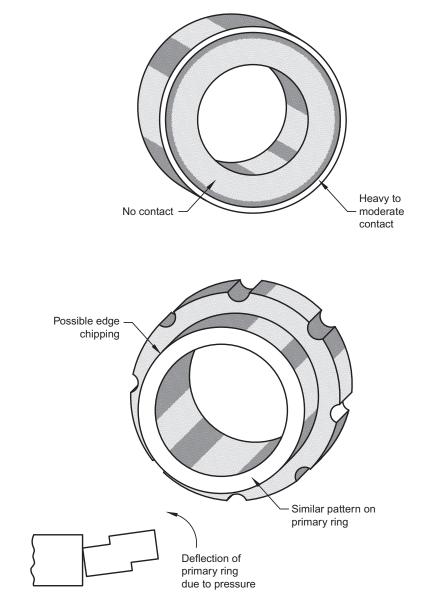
Mechanical seal contact pattern due to coning (negative rotation).
